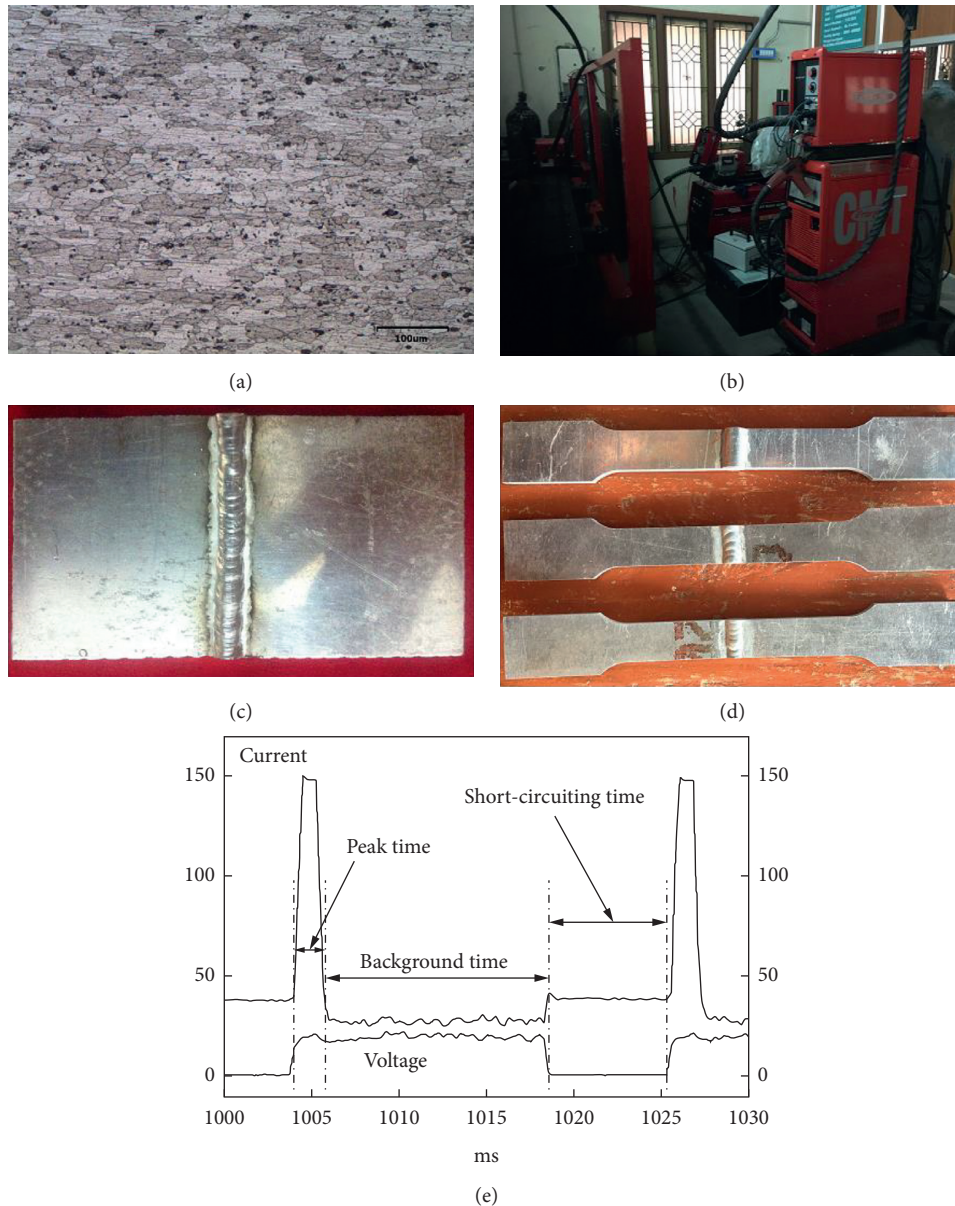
(a) Microstructure of base material. Photograph of (b) CMT machine, (c) fabricated P-CMT welded joint, (d) tensile specimens, and (e) process parameters [23].
